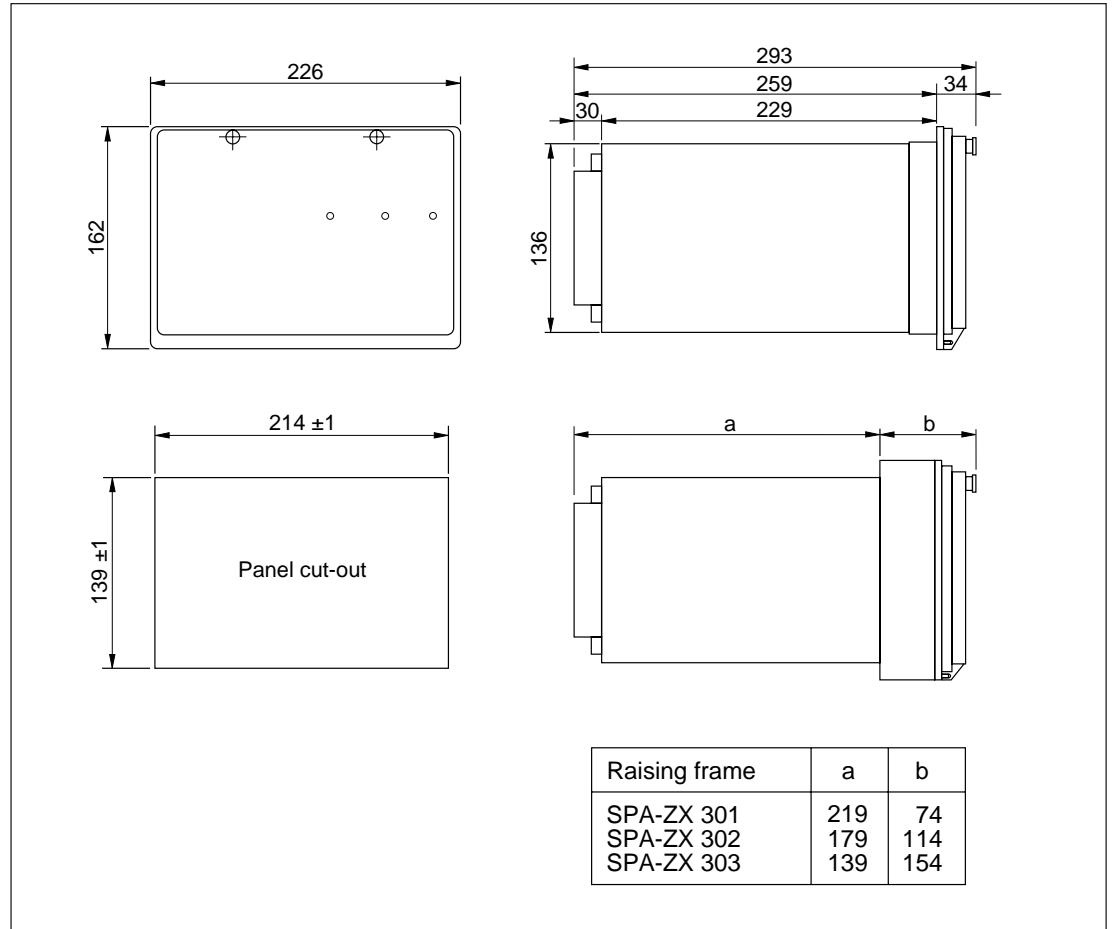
Dimension and mounting drawings for differential relay SPAD 346 C.
